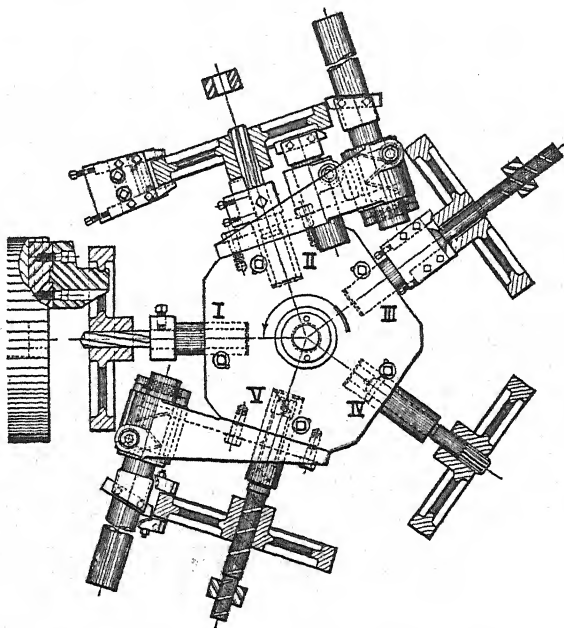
A Setup for Machining a Gray-Cast-Iron Gear Blank in the First Chucking Position.
